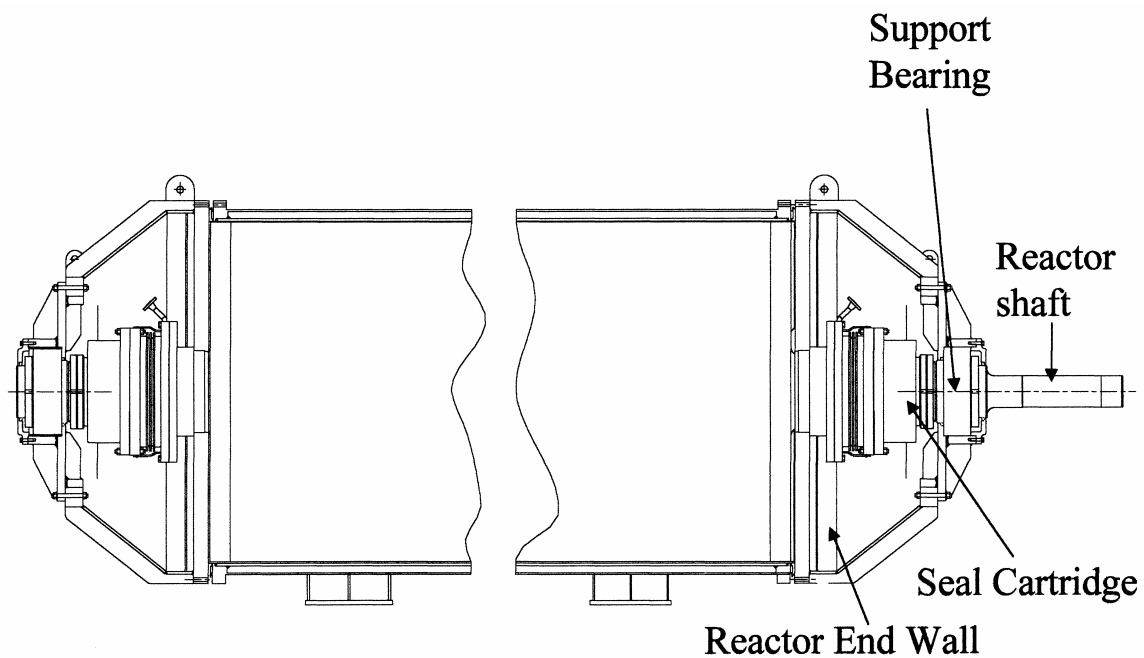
Reactor Outline Drawing Showing Seal Cartridge
